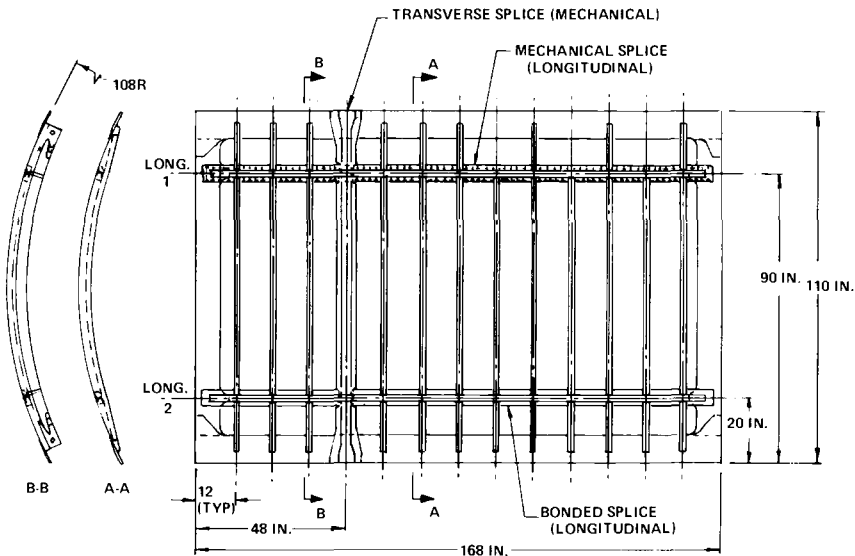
Structural arrangement of test panel (1 in. = 2.54 cm).
